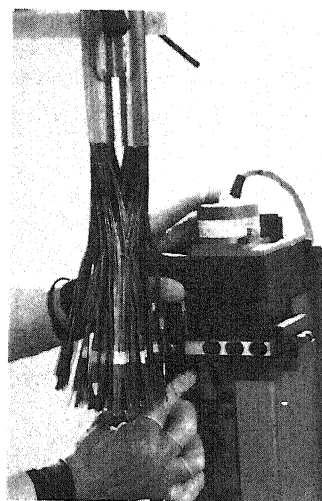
Procedure of ultra-sonic welding in conductor joint
